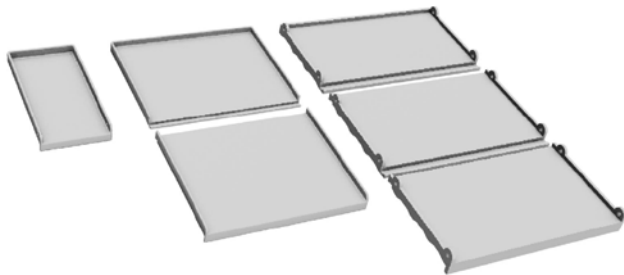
Sketches of single- and multi-segment bottom plates operating in chamber furnaces made by SECO/WARWICK ThermAL SA [5]: materials: GX40CrSi24, GX40CrNiSi27-4 or GX40CrNiSi25-20
